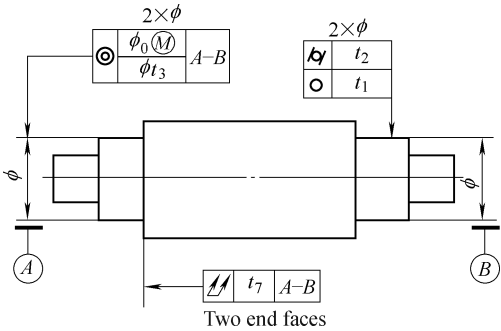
Marking method of the geometric tolerance of the shaft diameter matching to grade 2 bearing
